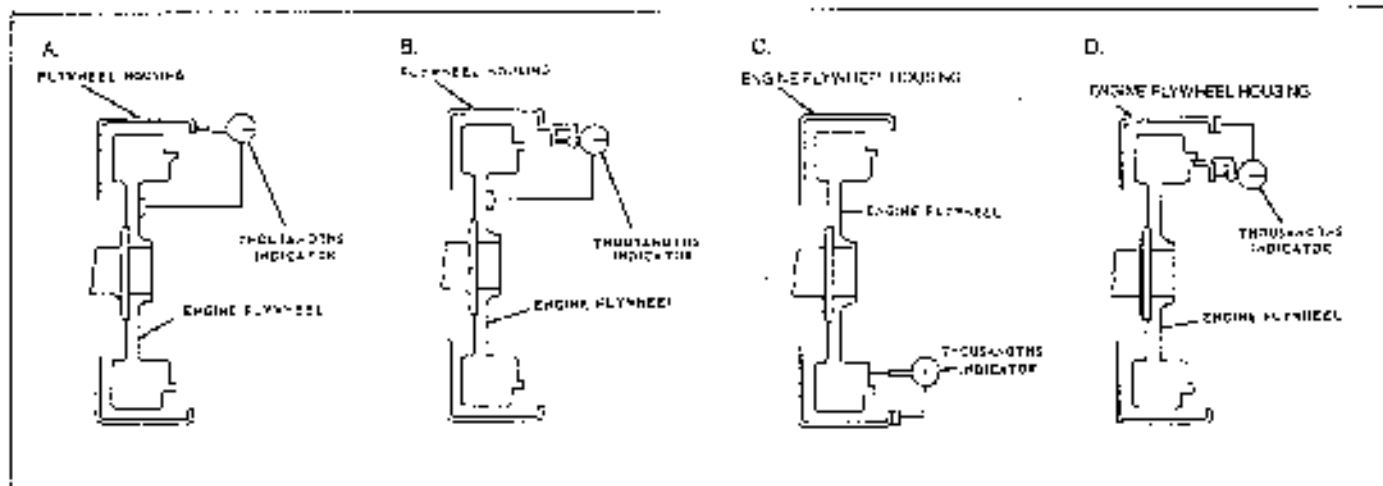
Dial Indicating Engine Flywheel and Flywheel Housing
